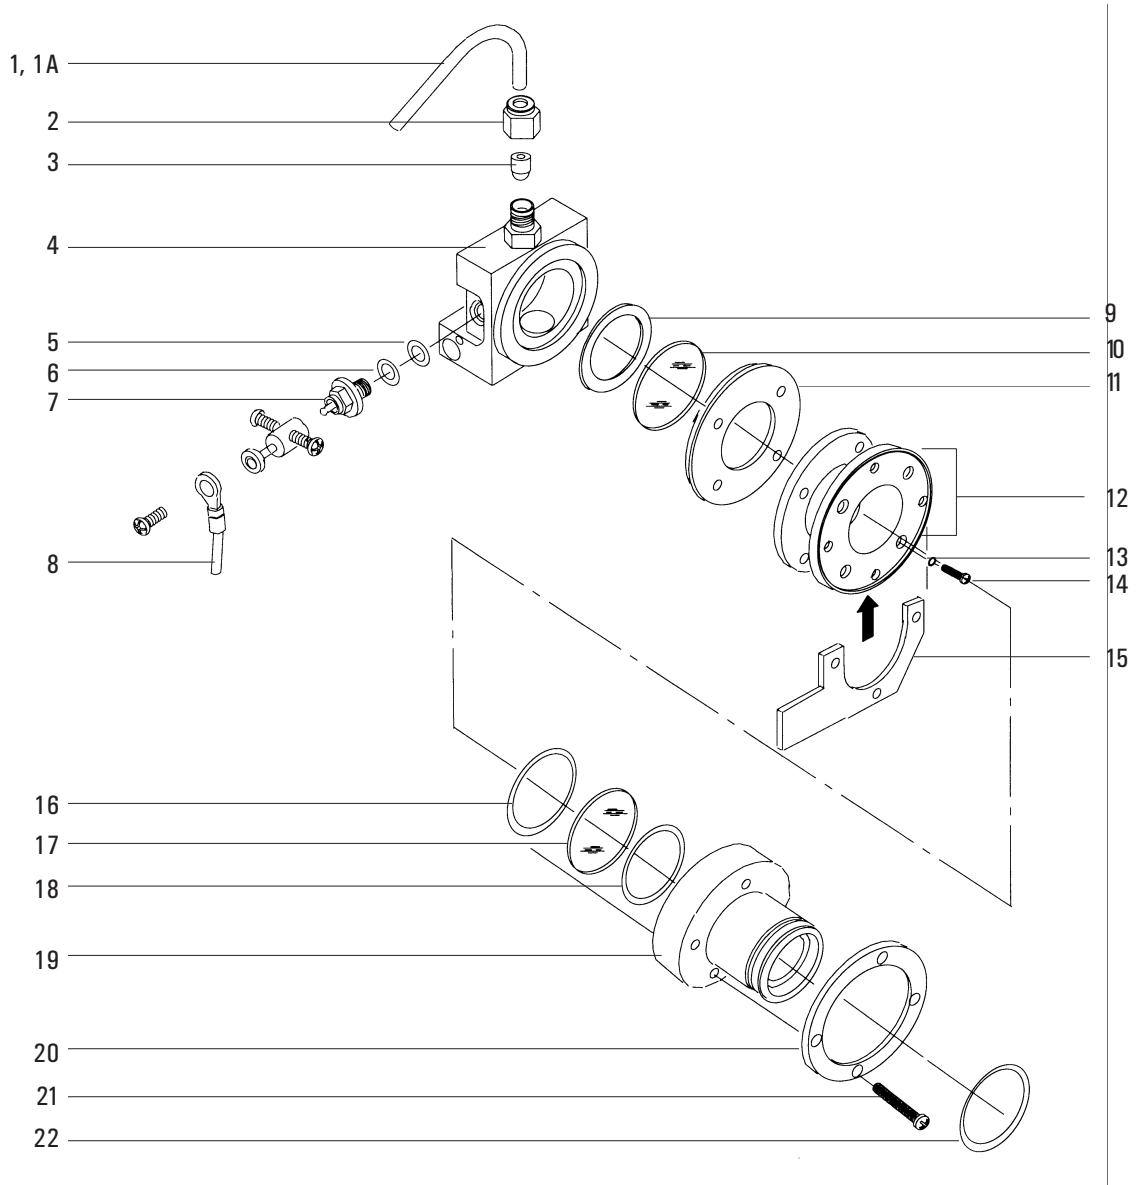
Exploded Diagram of the Flame Photometric Detector
